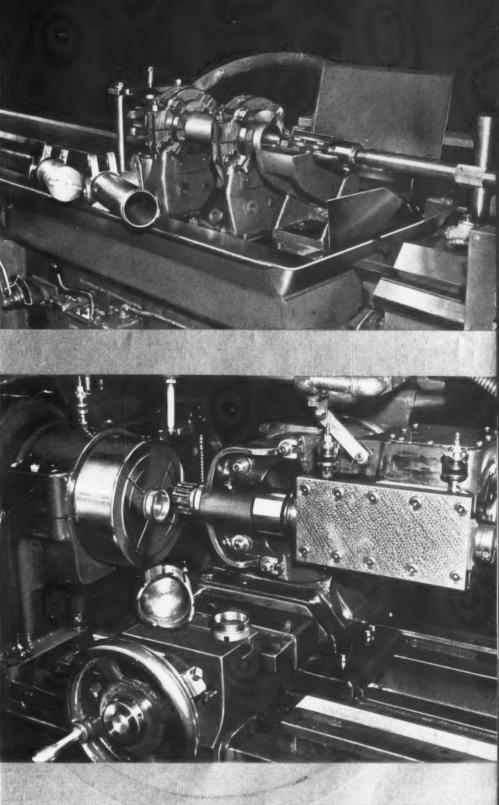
Honing a Strut Piston on a Machine of the Hydraulic Type that is Used to Produce the Largediameter Bore Completely from Solid Stock
